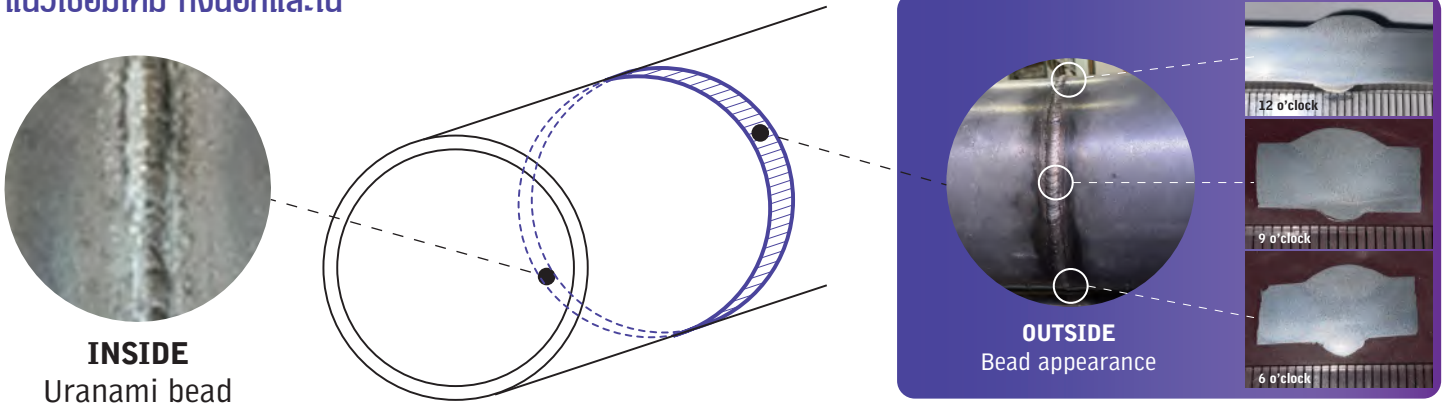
Bead appearance and macrostructure of weld metal's cross-section (welding condition : root pass; dia 2.6 mm, AC 90A, hot pass; dia 3.2 mm AC 100A)
